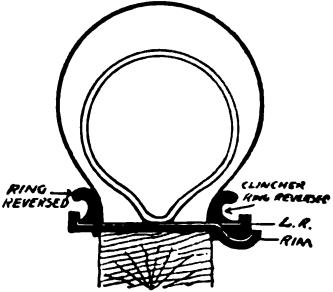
Straight side tire on a quick detachable rim where the clincher part of rim is reversible—universal rim.
